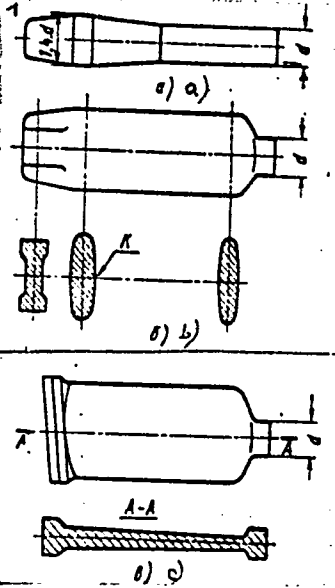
a - Preliminary operation - flattening; b - stamping in the final die before the approach of the punch; c - finally formed forging
